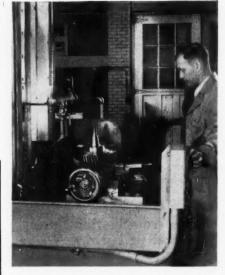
Broaching machine used for broaching the turbine wheel shown in Fig. 1.
